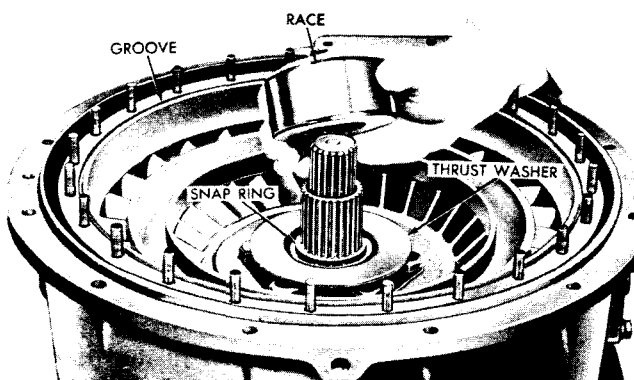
Installing (or removing) freewheel roller race ^{S2516}
